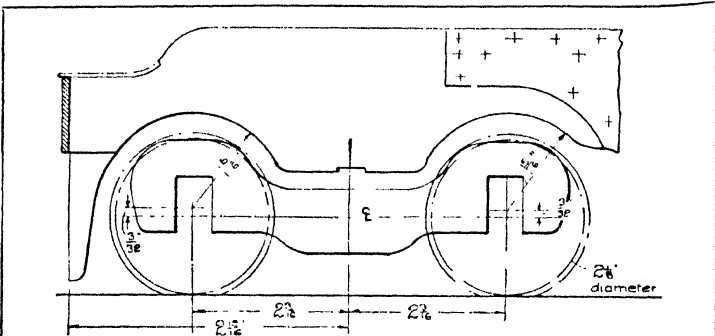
Front End of Frames in "George V" Locomotive Showing Clearance for Bogie Wheels.
